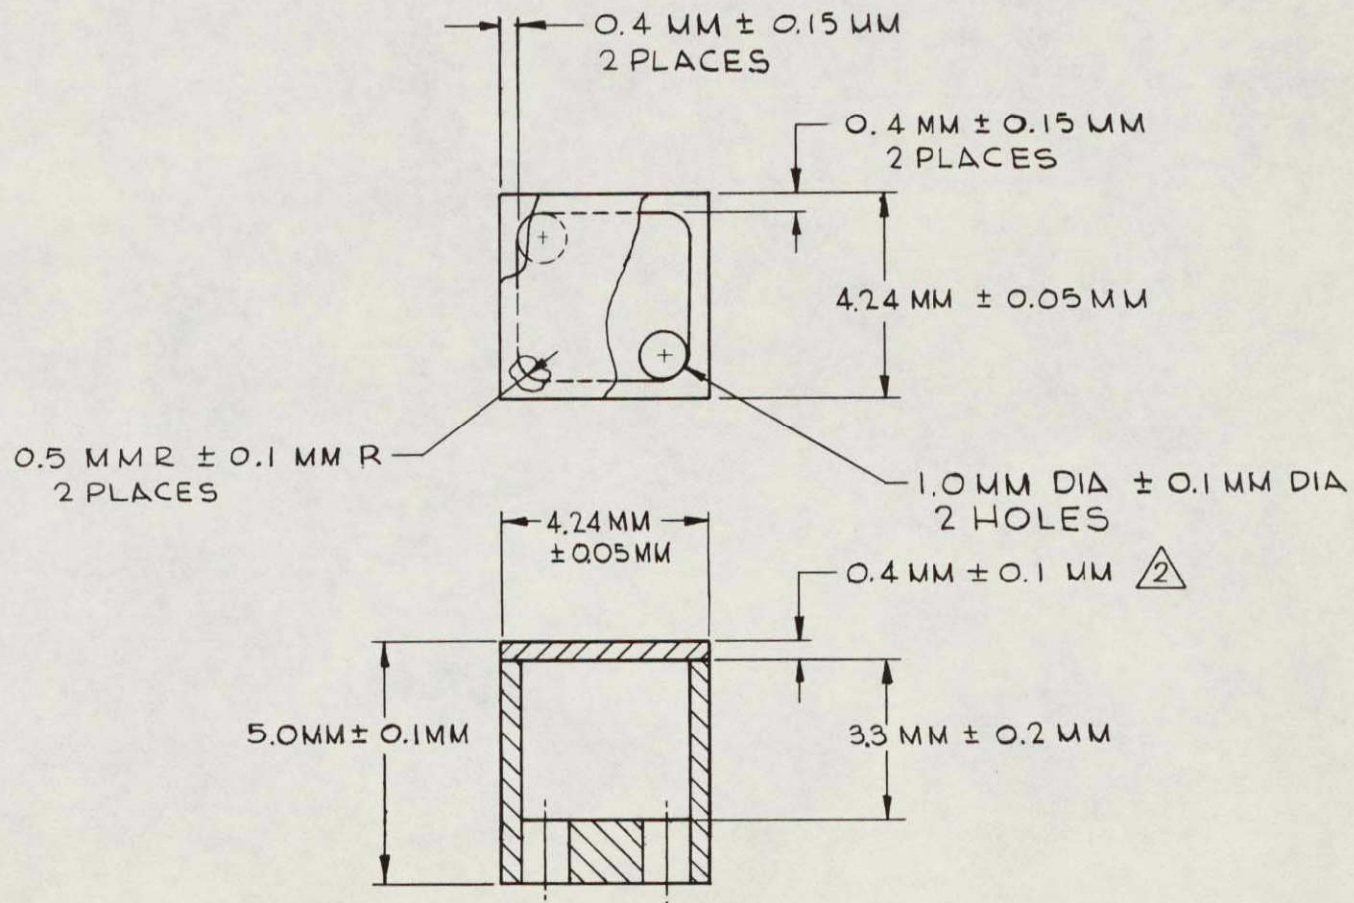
MEED Quartz Cuvette Assembly
